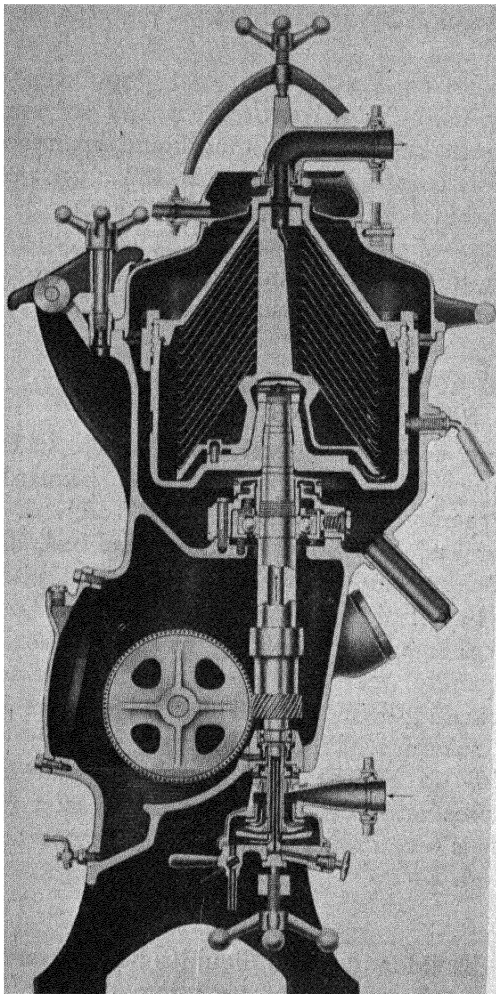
TYPICAL DE LAVAL CENTRIFUGAL CLARIFIER WITH INLET THROUGH THE HOLLOW DRIVING SPINDLE
